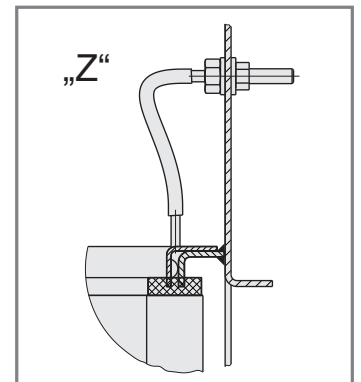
Ducted HEPA filter unit with prefilter casing: F370
